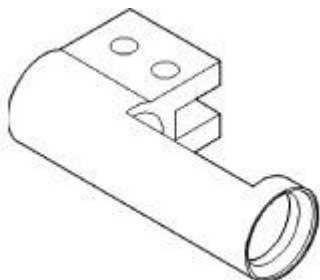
ADAPTER, VALVE SPRING - 6526A
